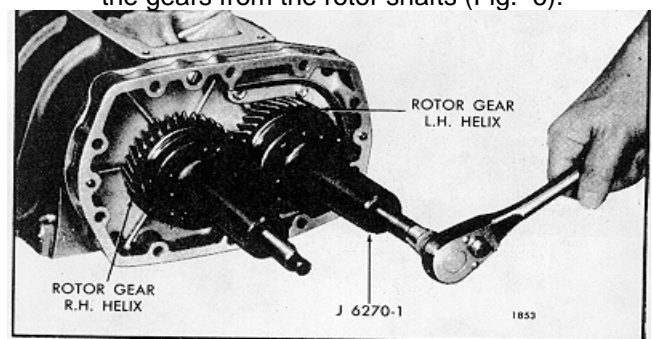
Removing Blower Rotor Gears from Blower Rotor Shafts
